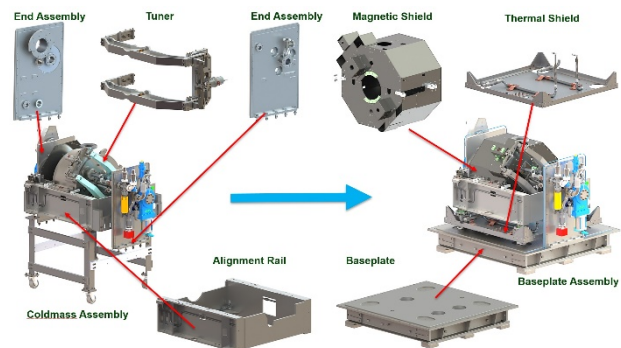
SRF- PI cryomodule coldmass integration for cryomodule assembly.
